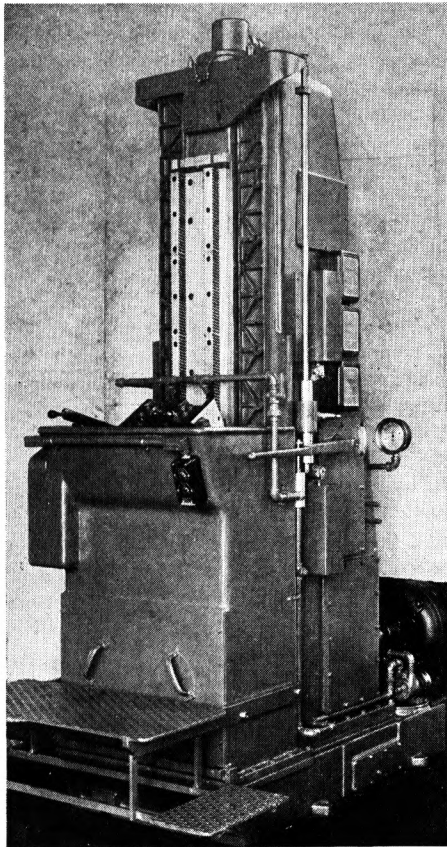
VERTICAL, HYDRAULICALLY OPERATED, SURFACE-BROACHING MACHINE OF THE PULL TYPE
